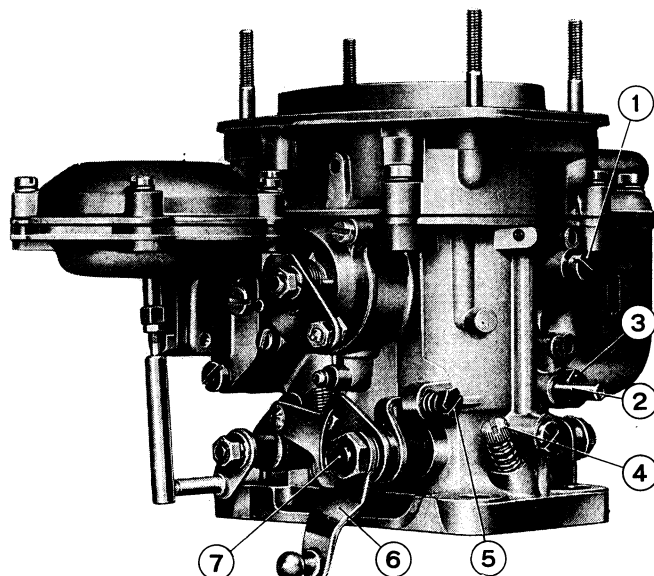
Weber 34 DCHD 4 carburetor for engine 115 C.005.
